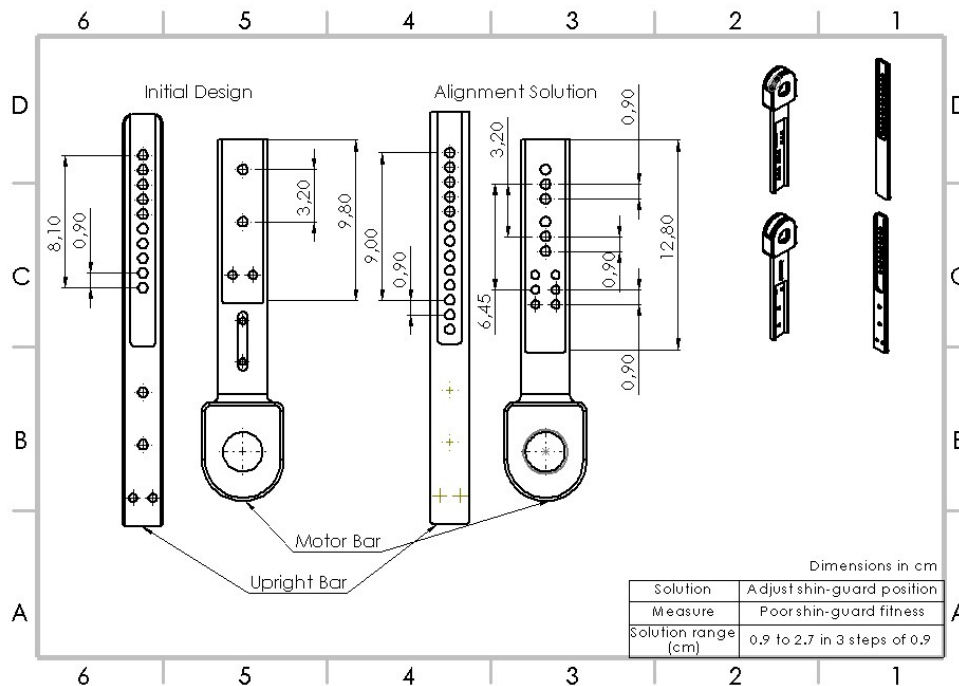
Technical drawing of the initial and final designs for the shin guard alignment solution.
